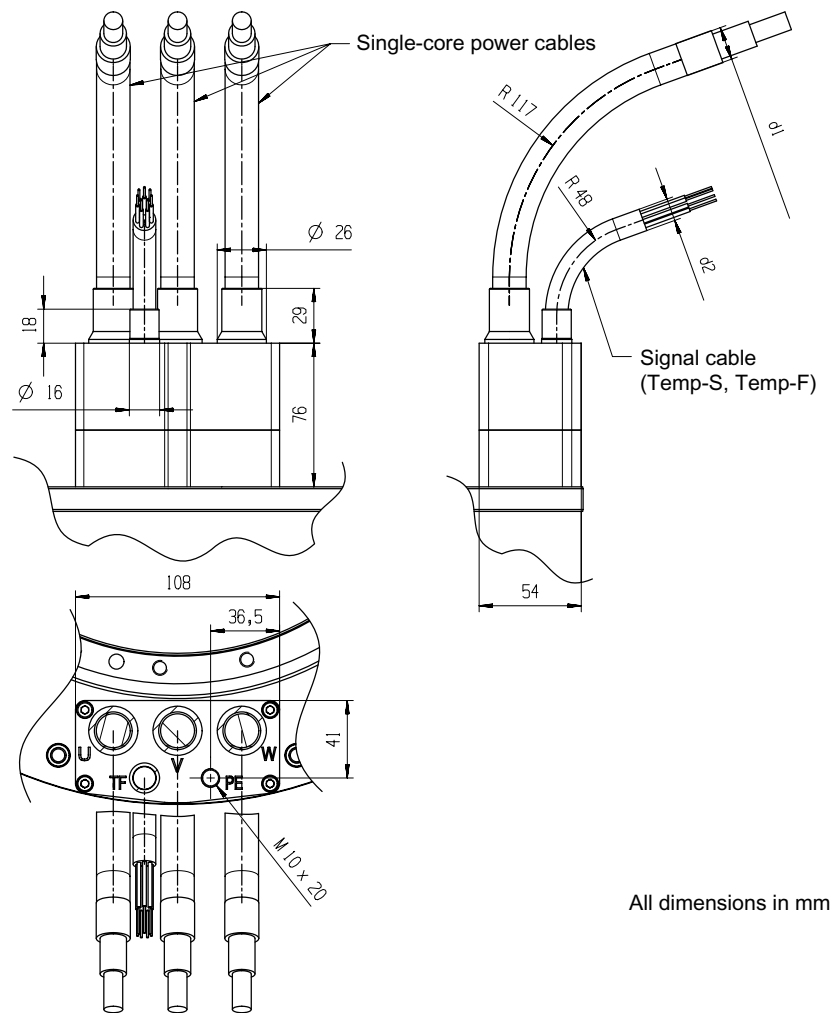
Axial electrical connection with sleeve and single core for 1FW6160 and 1FW6190, 50 mm² core cross-section
